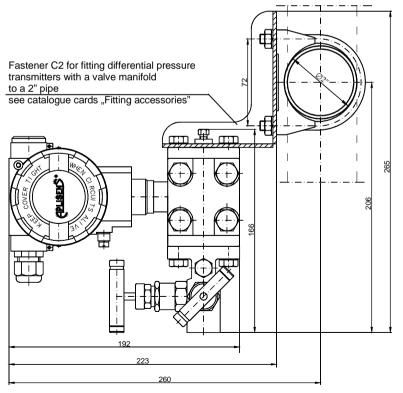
Example: how to install the APR-2000/AL transmitter with a valve manifold to a 2" pipe.
